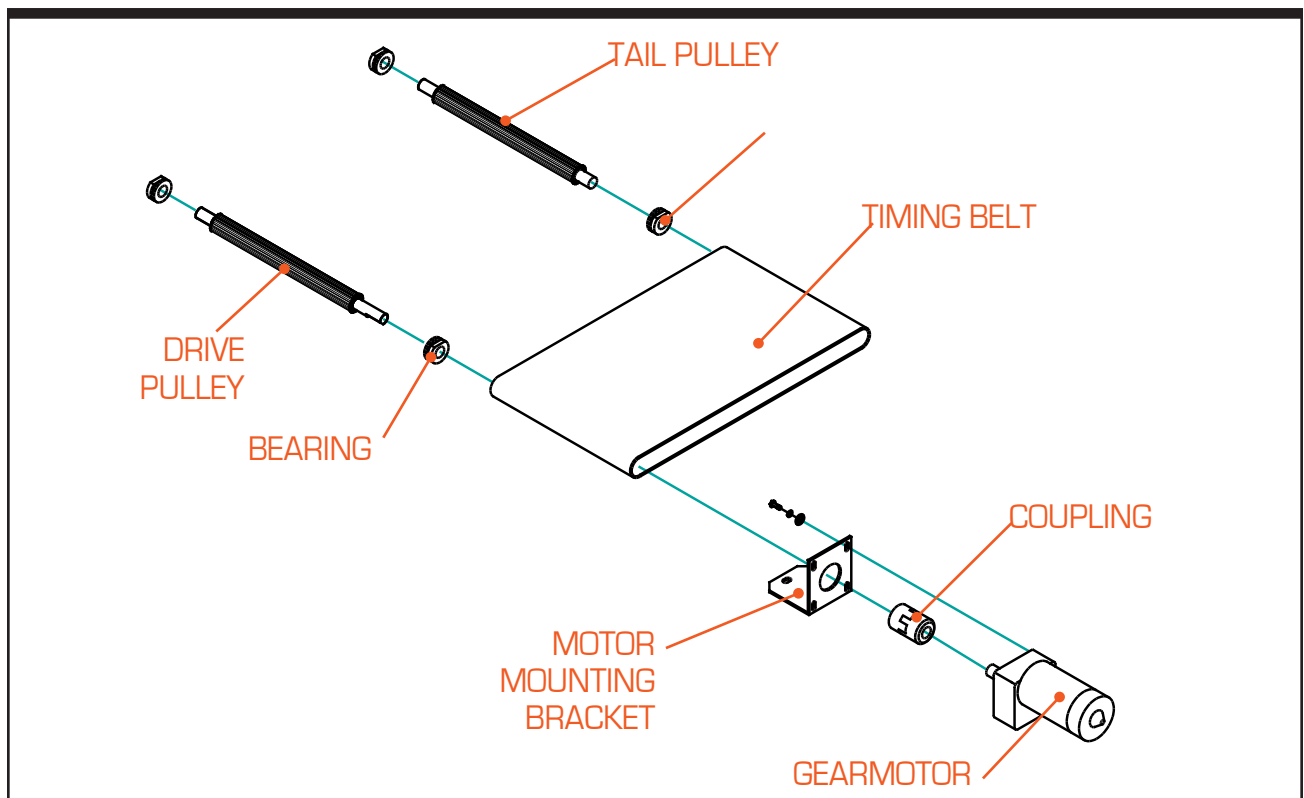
Belt/Drive Assembly [DC Motor Shown for Clarification]
